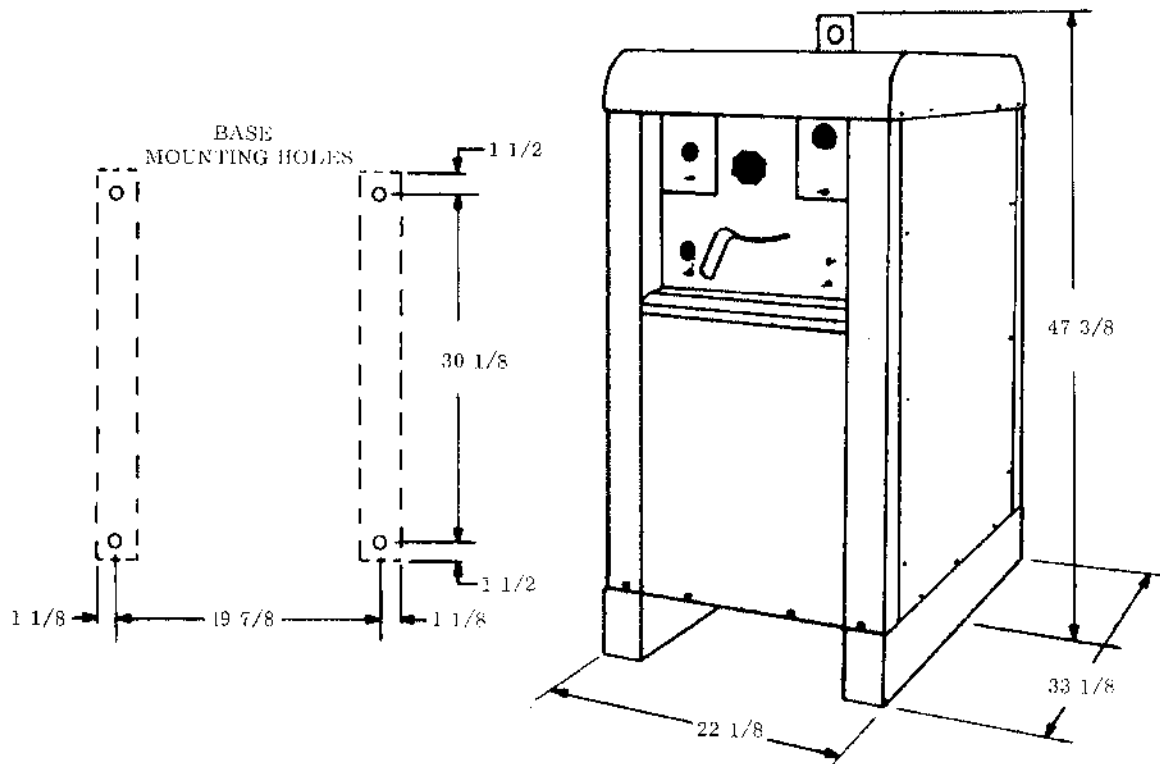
DIMENSIONAL DRAWING & BASE MOUNTING HOLE LAYOUT
